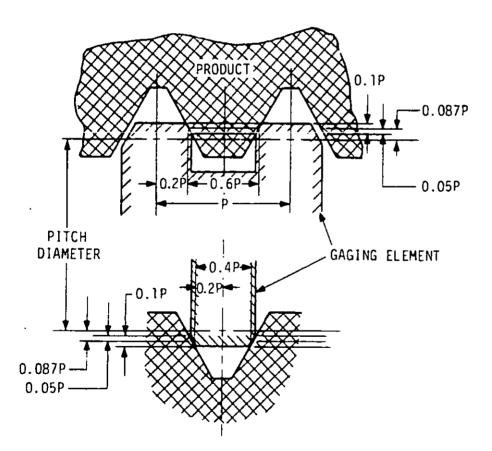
C.8 Gaging element profile for product internal pitch diameter measurement and cumulative form analysis using short straight flank contacts 3.4 <u>Product internal thread measurement, ball contact.</u> The three "best size" ball configuration for pitch diameter measurement on internal threads is illustrated in figure 22.C.9. Since the two balls on the one jaw are free to roll along a small axial distance, they may be spaced several pitches apart. As an alternate, "best size" ball contacts are acceptable.
